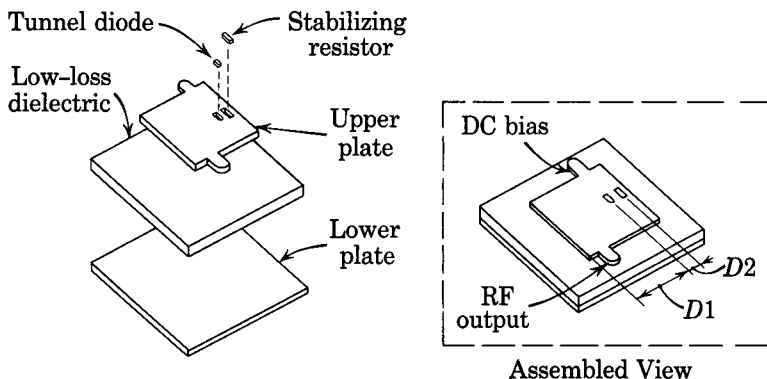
Exploded view and assembled view of tunnel diode oscillator using strip transmission-line construction
